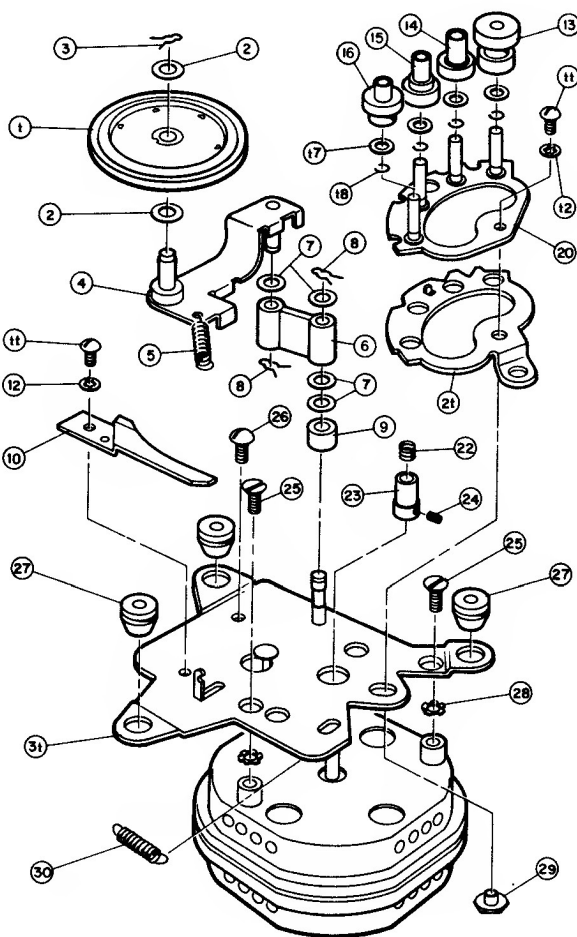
Four-Pole Motor Assembly (Stamped 971584-1)
